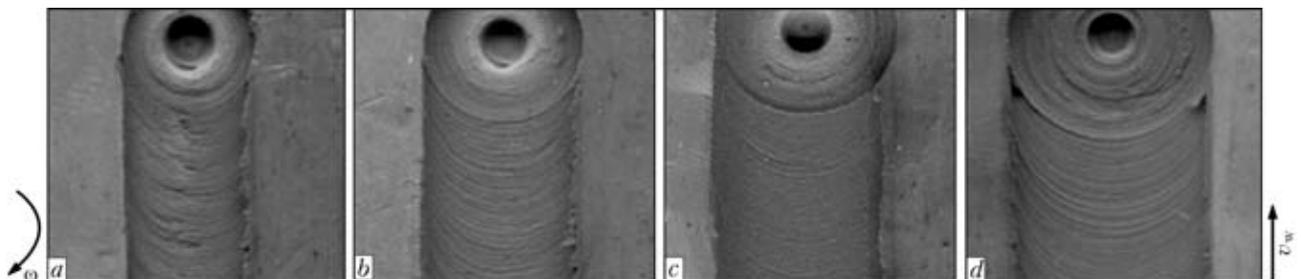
Appearance of welds made by FSW using tools with shoulder diameter of 10 (a), 12 (b), 14 (c) and 16 (d) mm and conical groove on their end face
